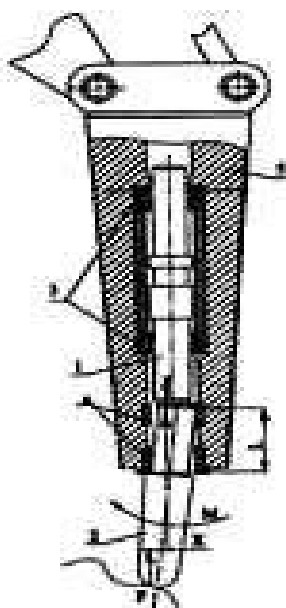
Tool loading diagram: 1 – tool; 2 – locking pin; 3 – striker support bushings; 4 – tool bushings; 5 – hammer body; L – length of support part; F – axial load; X – shoulder; M – bending moment [18]
